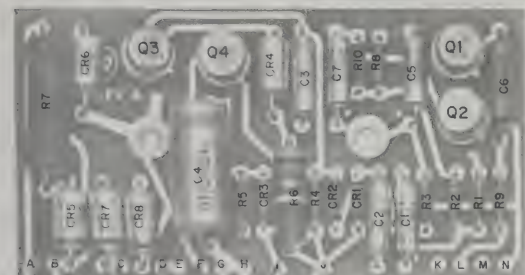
Oven Control Assembly A25 and Oscillator Assembly A26
